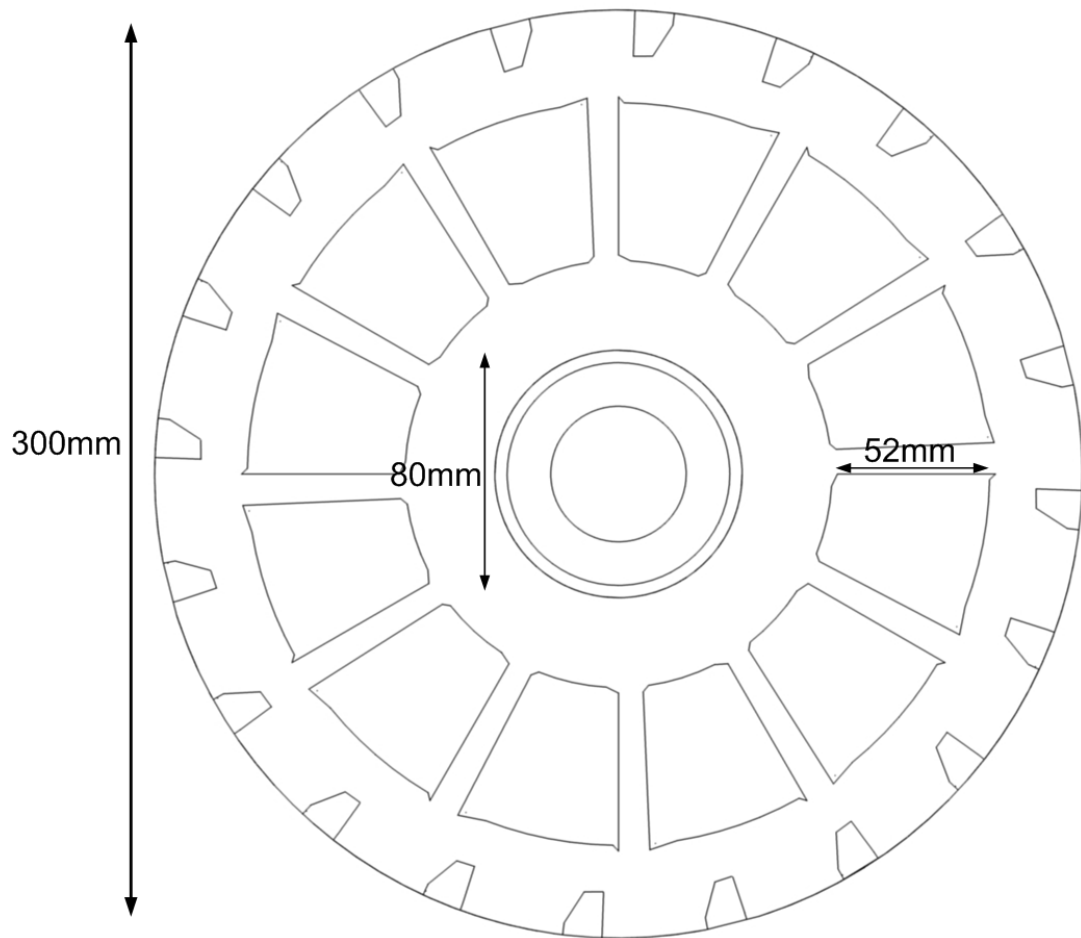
Dimensions of the 30 cm mill: discharge end
